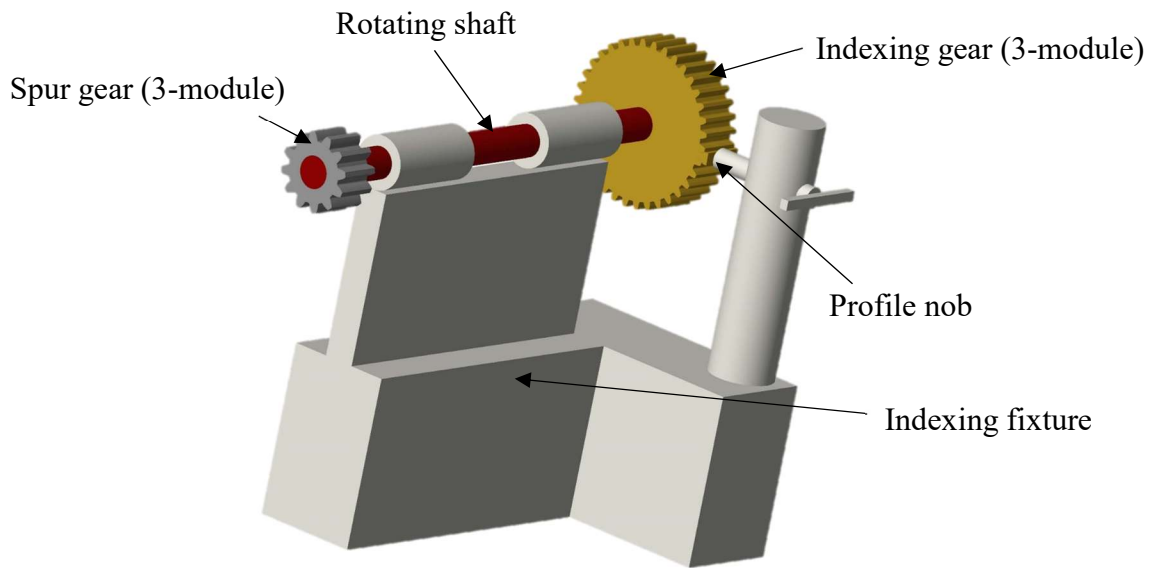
CAD model of indexing fixture for holding spur gear profile teeth during its teeth profile finishing
